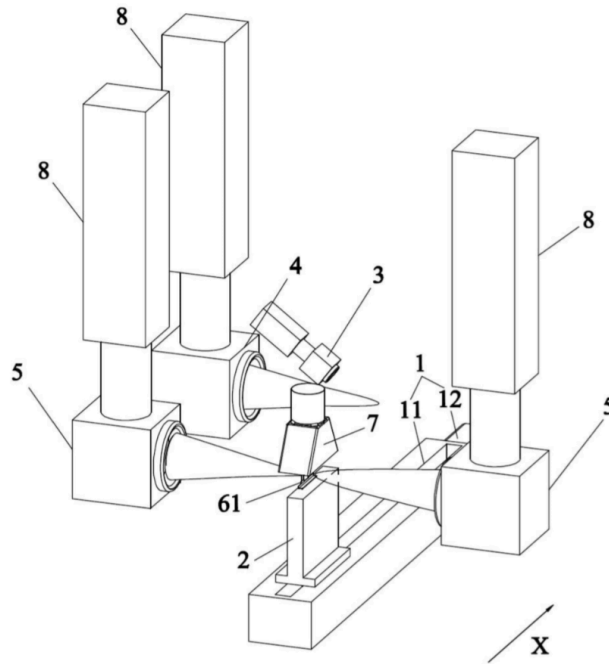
Example of a laser-assisted disassembly device. Adhesive on battery tabs is first cut using a high-precision laser (4), then cleaned via a secondary CO₂ laser module (5). The system includes motion control, vision sensing, and dust removal (CN217512456U).
